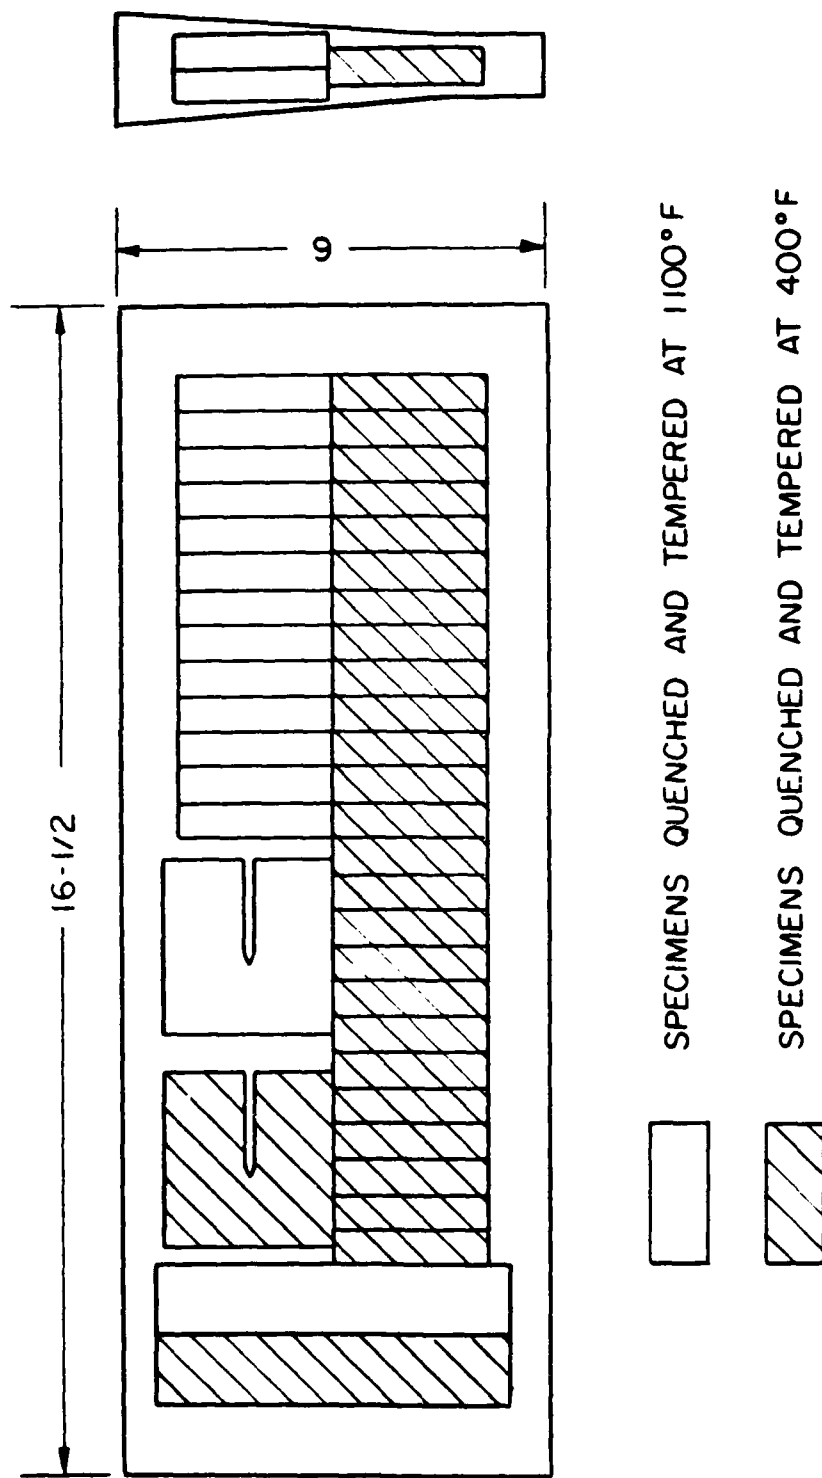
LAYOUT OF TENSILE, CHARPY V-NOTCH IMPACT AND PLANE STRAIN FRACTURE TOUGHNESS TEST SPECIMENS.
